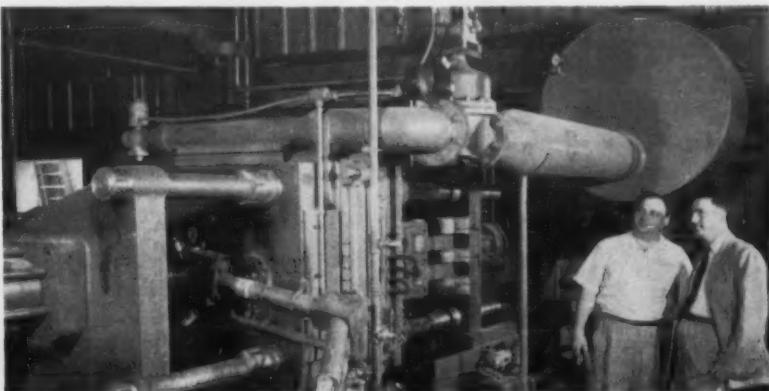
Atmospheric pressure pushes molten metal directly from furnace into vacuumed dies on this 400-ton machine.
